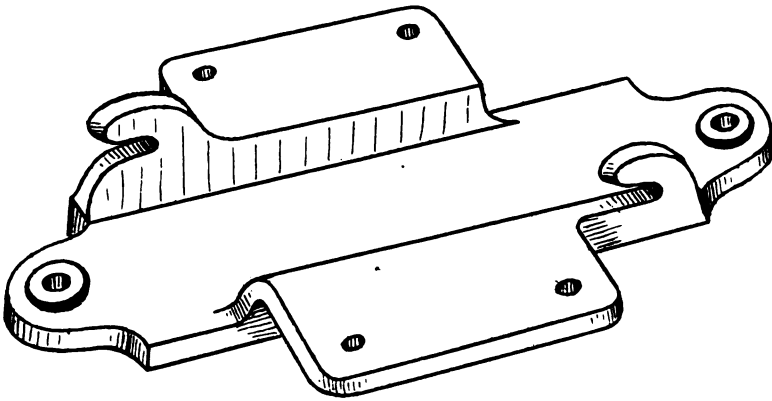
BRACKET FOR MOUNTING TRANSFORMER.
